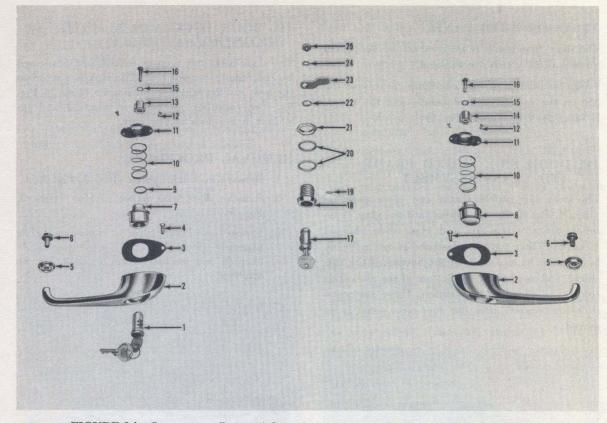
Component Parts of Outside Door Handles and Deck Cover Key Lock.
